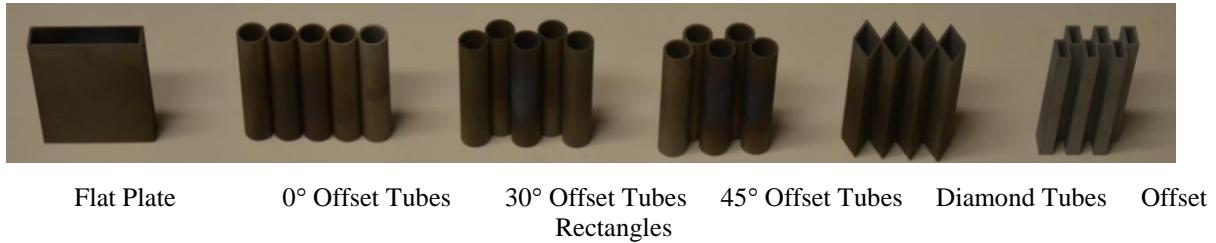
Prototype meso-scale fractal-like receiver parts fabricated with power-bed-fusion additive manufacturing using Inconel 718. The parts are all 5 cm tall and were tested on-sun in the solar furnace at $\sim 30 \text{ W/cm}^2$.
